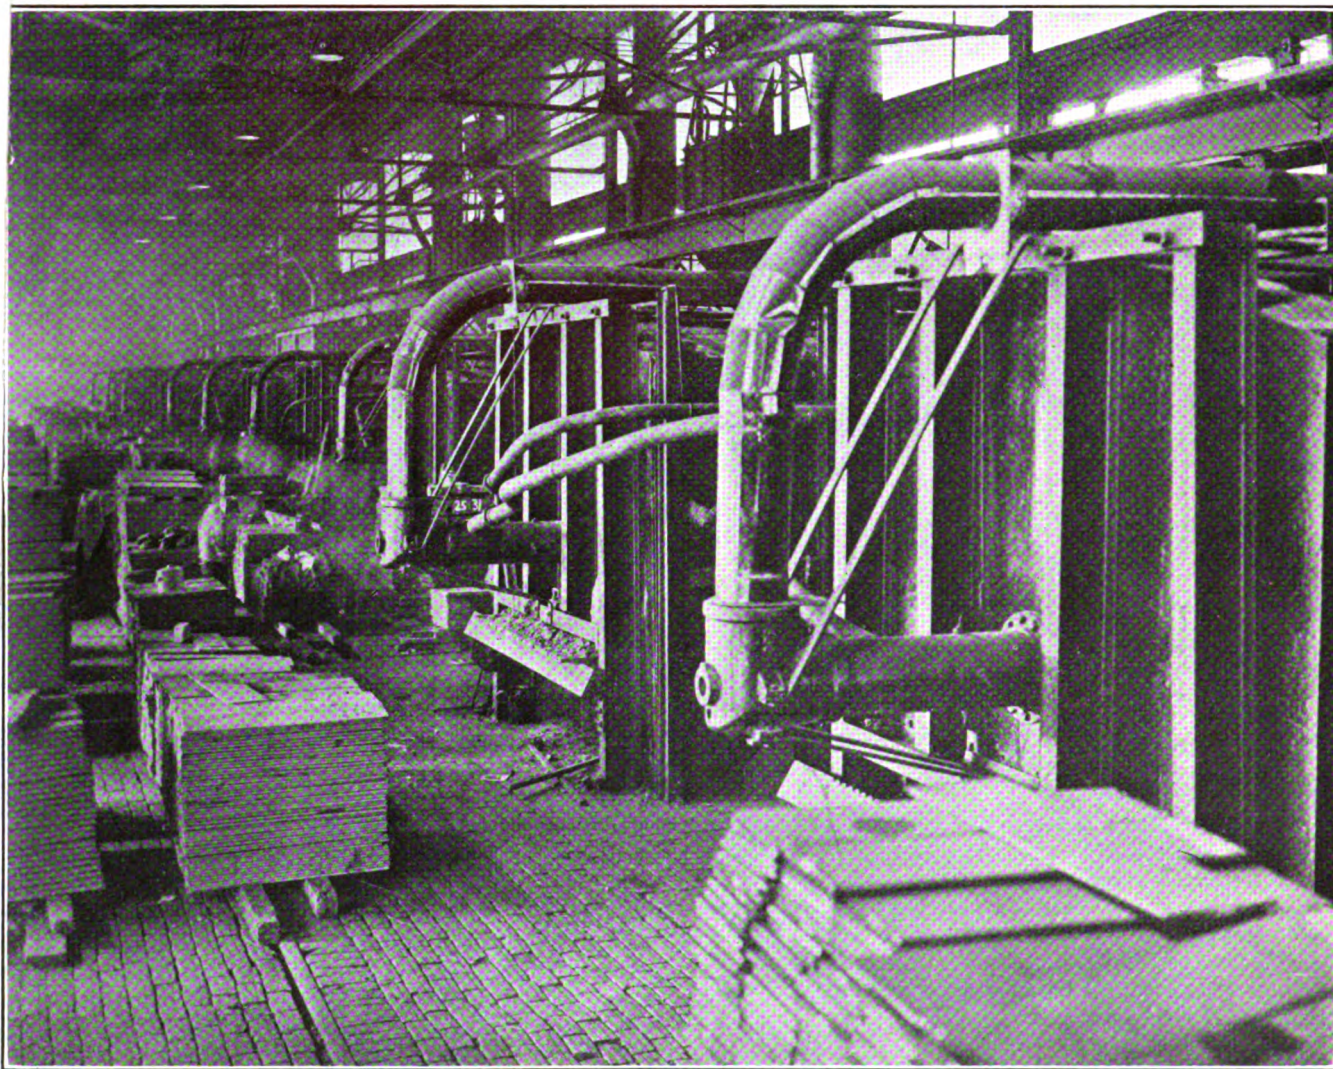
Rear view of Hagan designed heating furnaces showing burner attachments and supply pipes.
